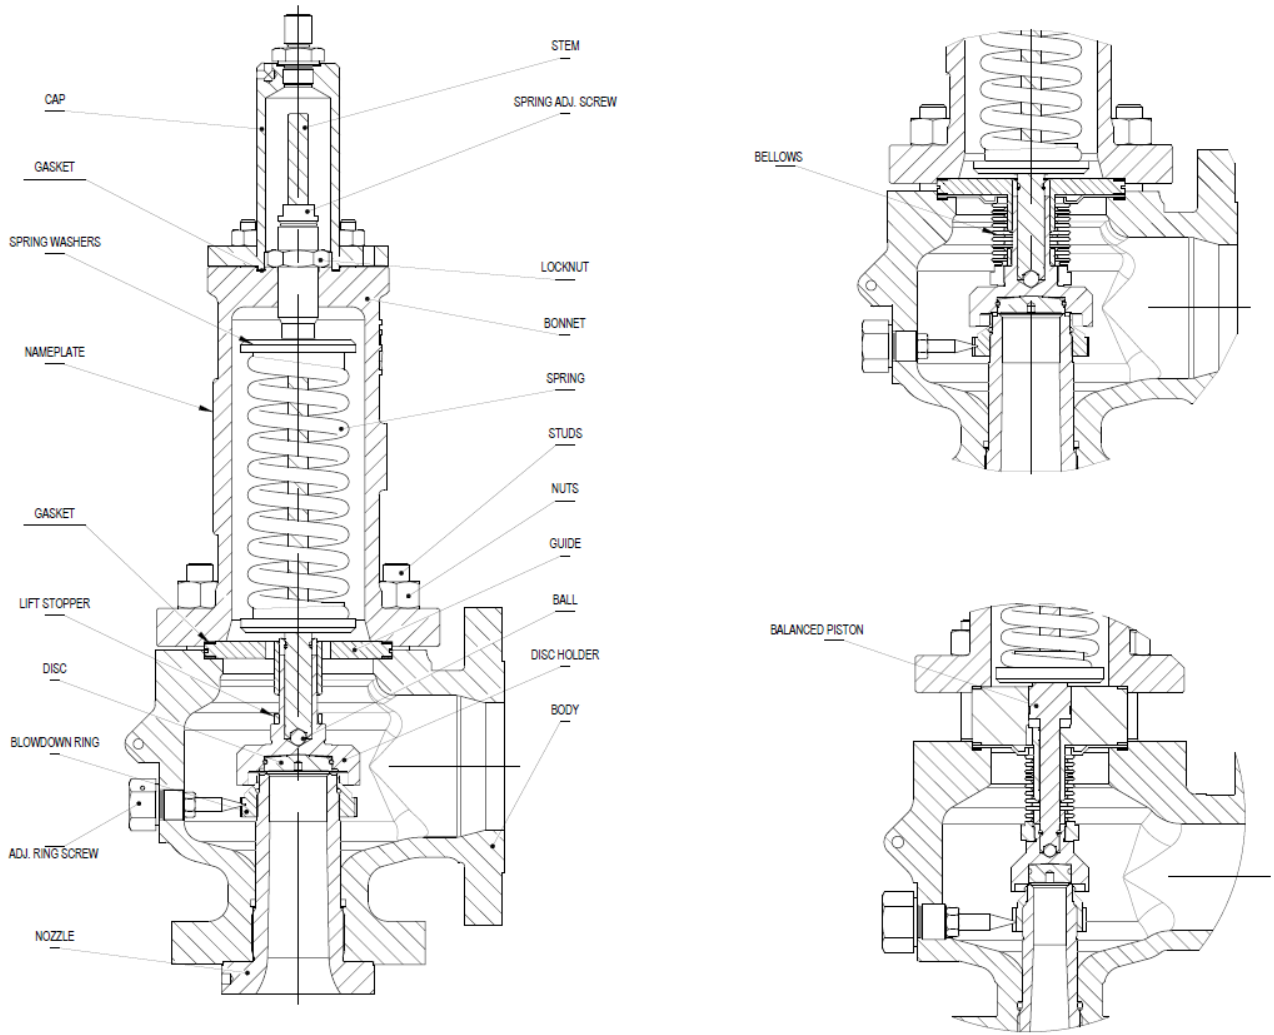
Cross-section Drawing: Spring Loaded Pressure-relief Valve
